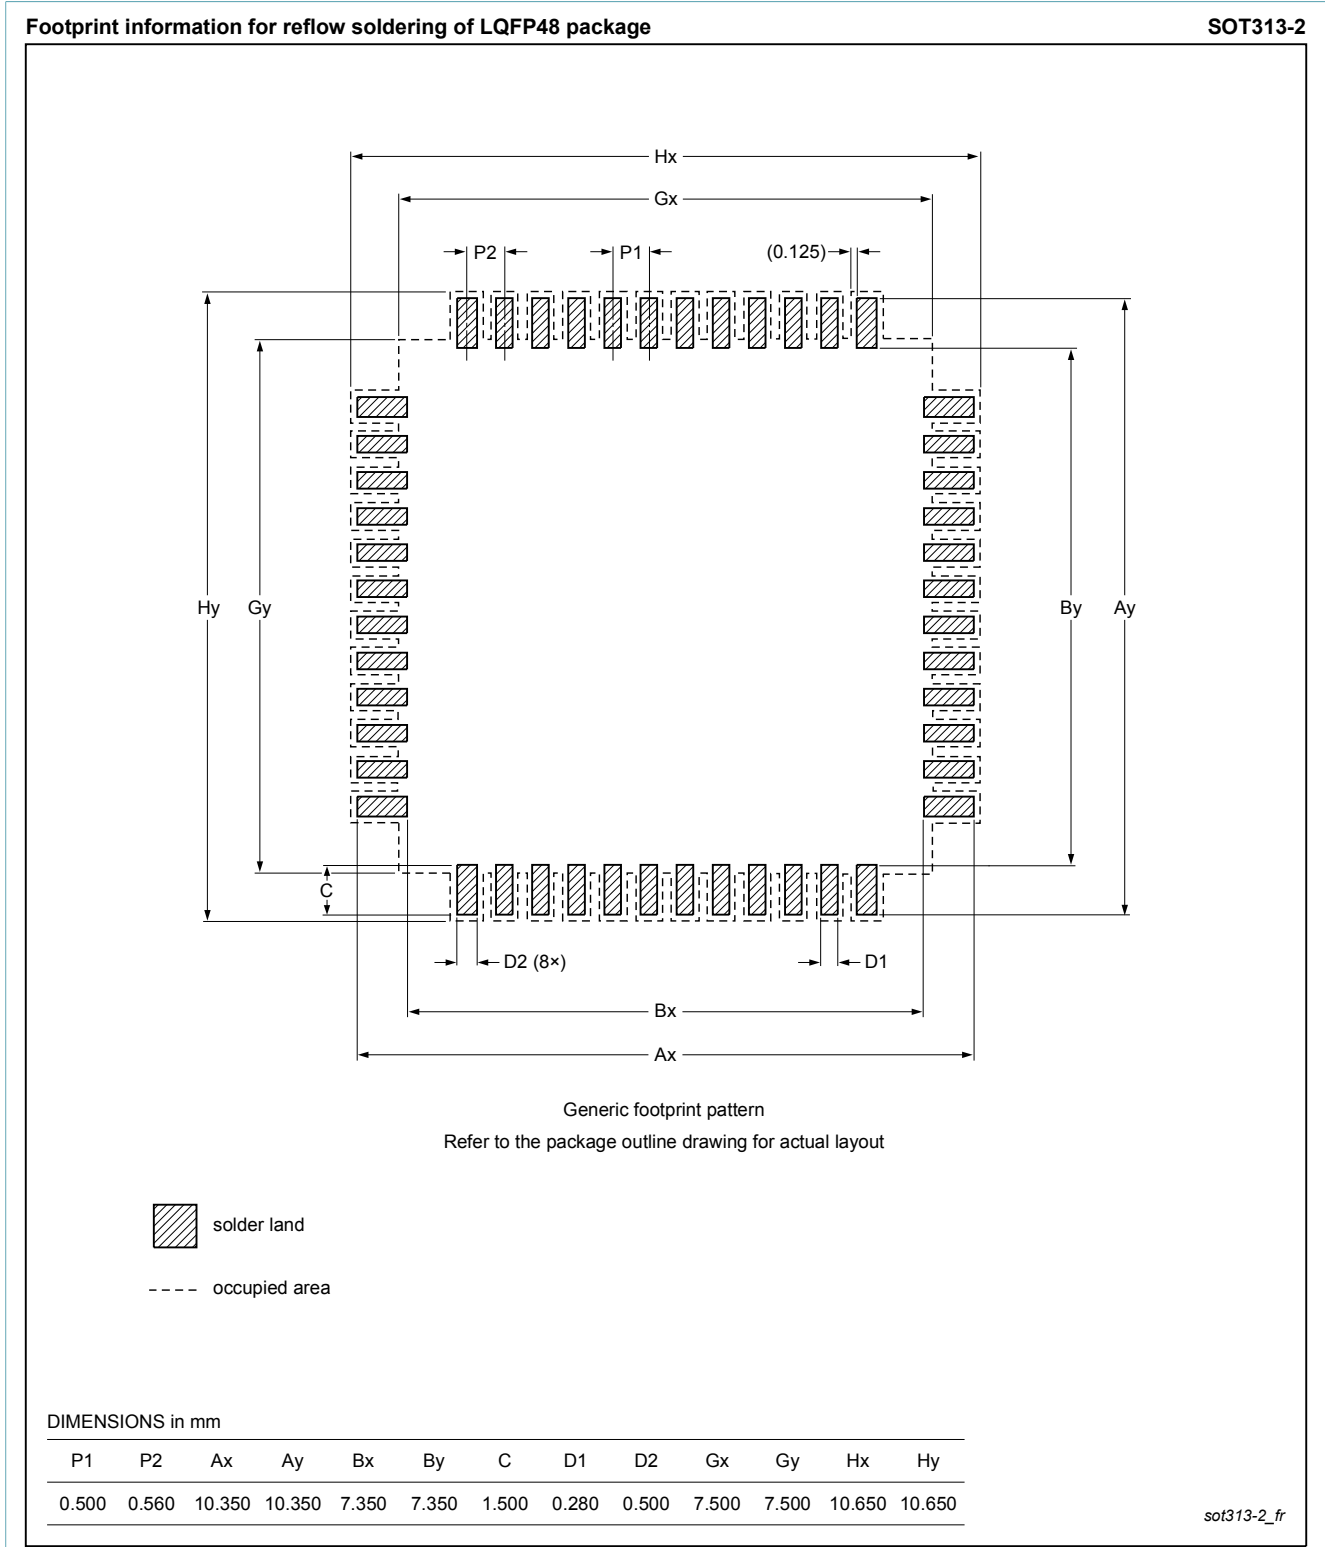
Reflow soldering footprint for LQFP48 (SOT313-2)
